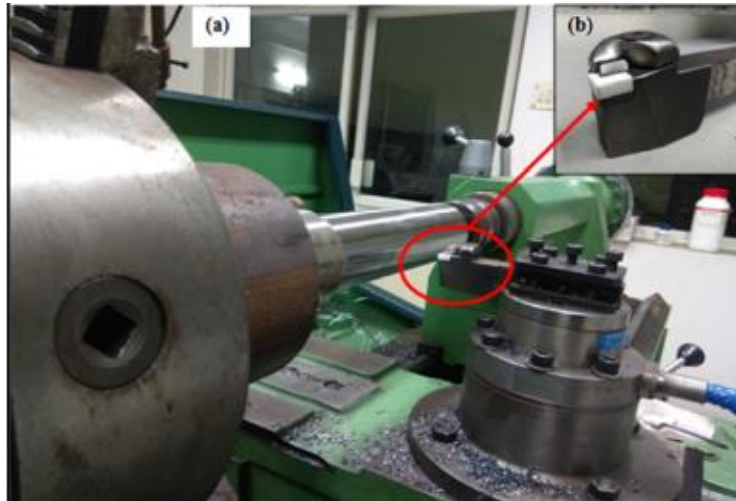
(a) Systematic drawing of conventional lathe (b) Tool holder (CSBNR2020K) with ZTA cutting tool [31]
